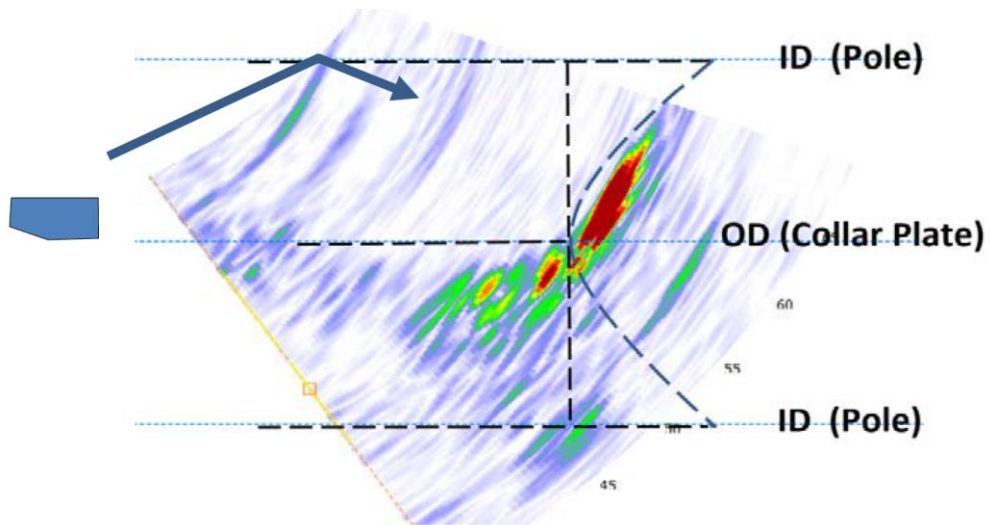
Scan of the Fillet Weld from the External Collar Side
